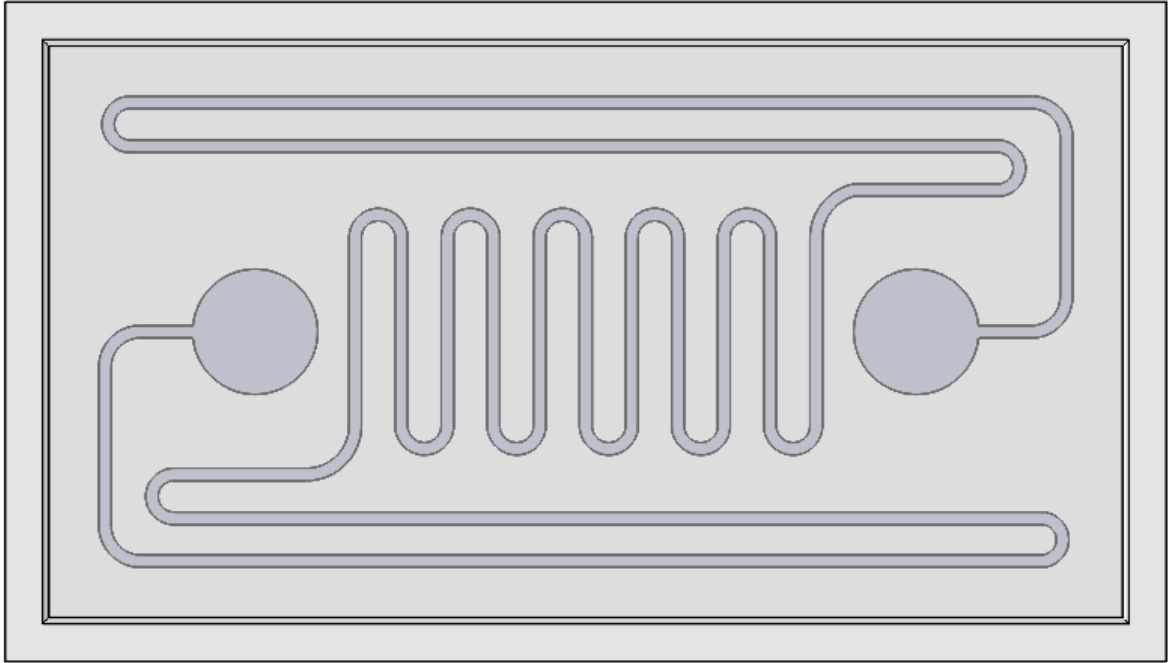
Bottom view of the final device design. LMPA channels were designed to be as close to each other and the edge as possible while maintaining device integrity for testing.
